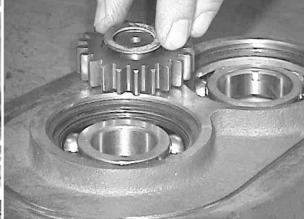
illustrates a detail of the REV gear. The photo below shows how the reverse gear is mounted on the closing flange of the gearbox housing.
